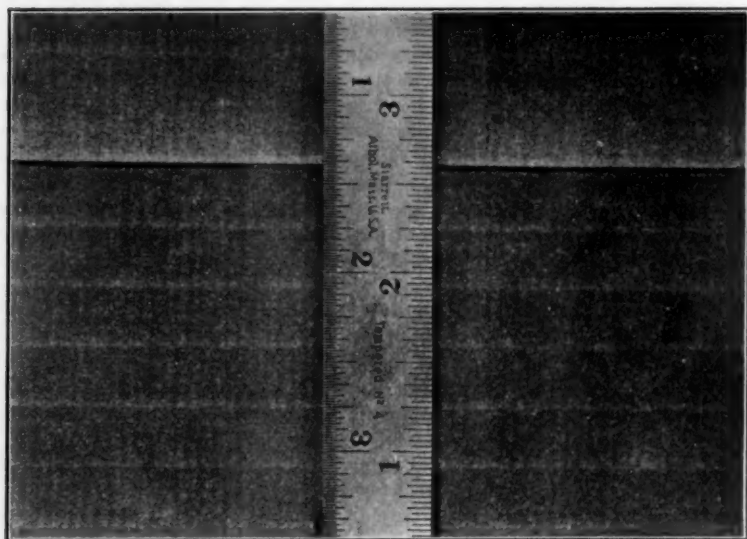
CHILLED CASTING, FINISH PLANED BUT NOT SCRAPED
